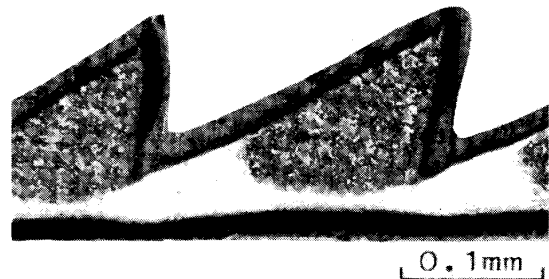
Cross section of chip in cutting of quench hardened steel under the conditions.
